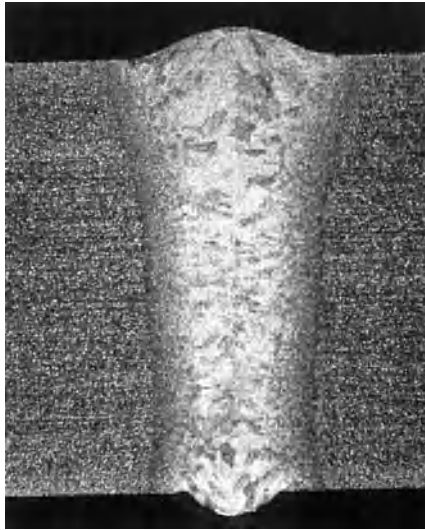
CO₂ laser beam weld of 6 mm thick alloy TA6V
